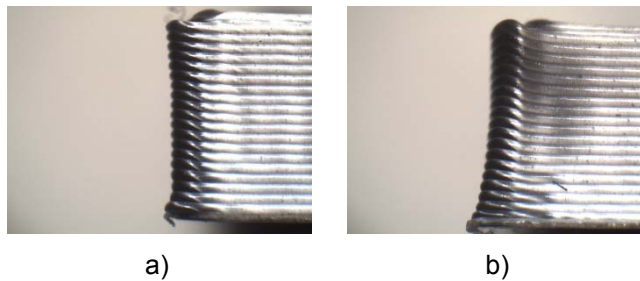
Side surfaces profiles a) with and b) without part cooler.
